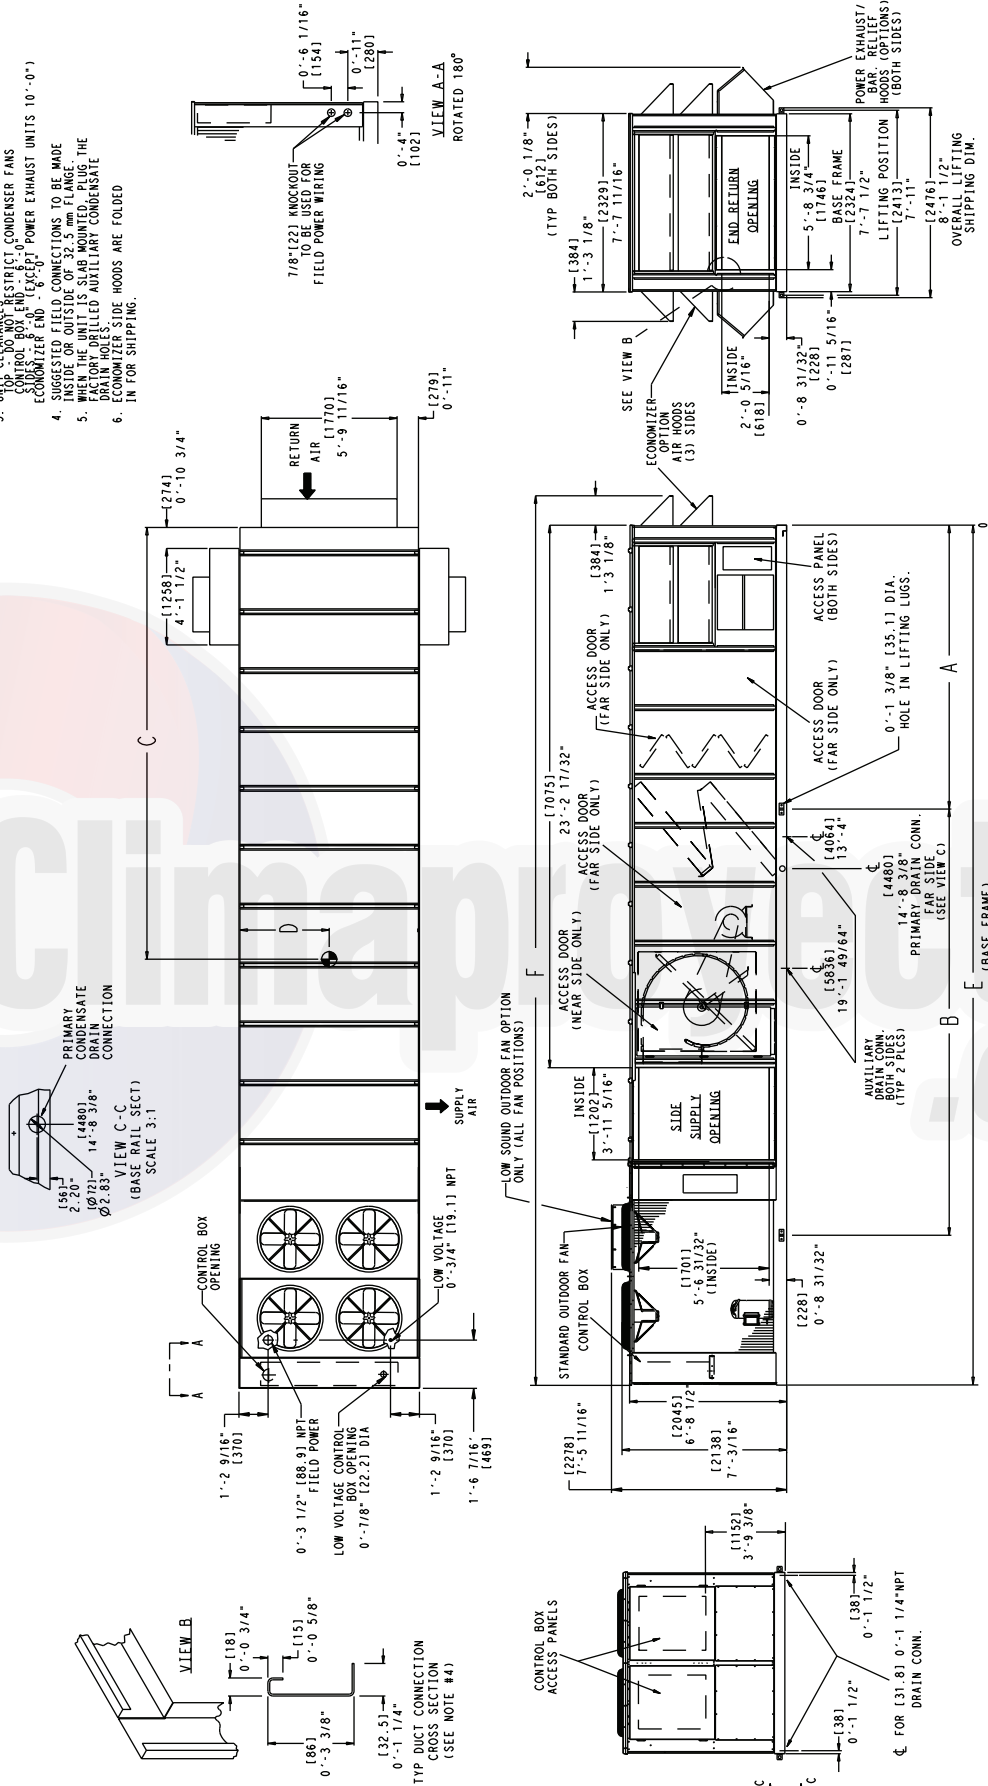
Base Unit Dimensional Drawing — 50P4, P5, P8, P9055,060 (Standard Chassis Unit Shown)
